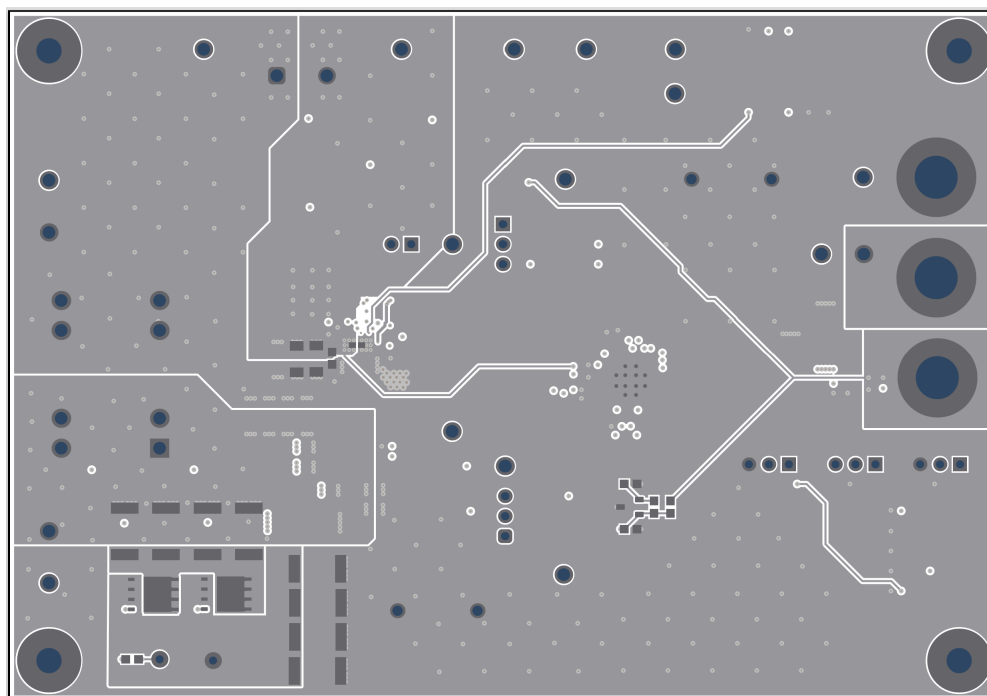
SR146A CSD967201-Q1EVM Bottom Mask View (Bottom View)
